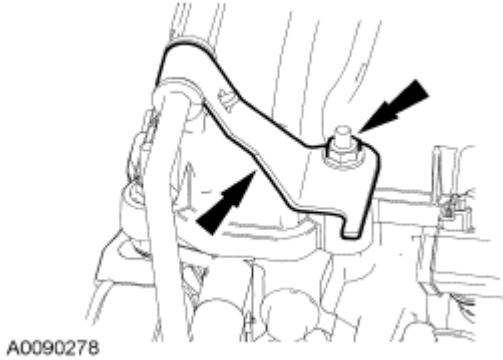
Locating Power Steering Tube, Bracket & Nut
